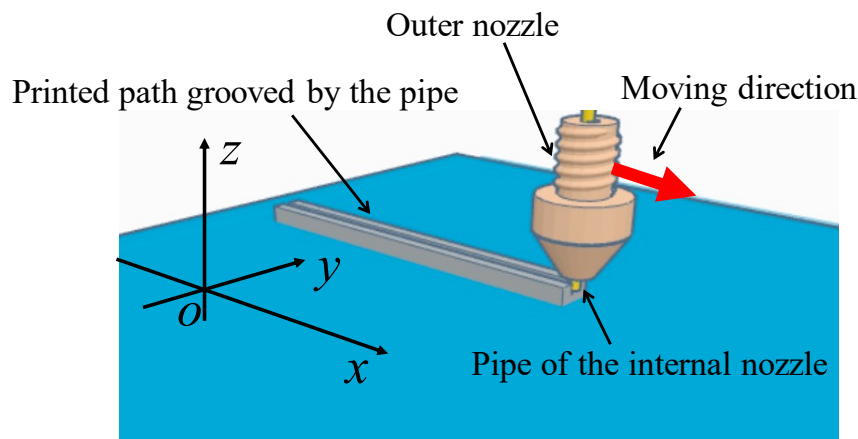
Schematic representation of the printing process when the pipe makes a groove on the printed path.
